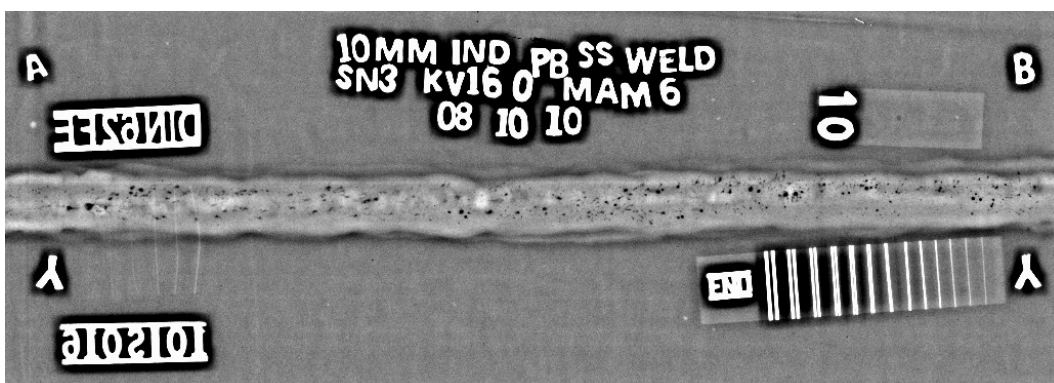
(b). Exposure of the same 10 mm thick steel weld with 160 kV X rays and film.
